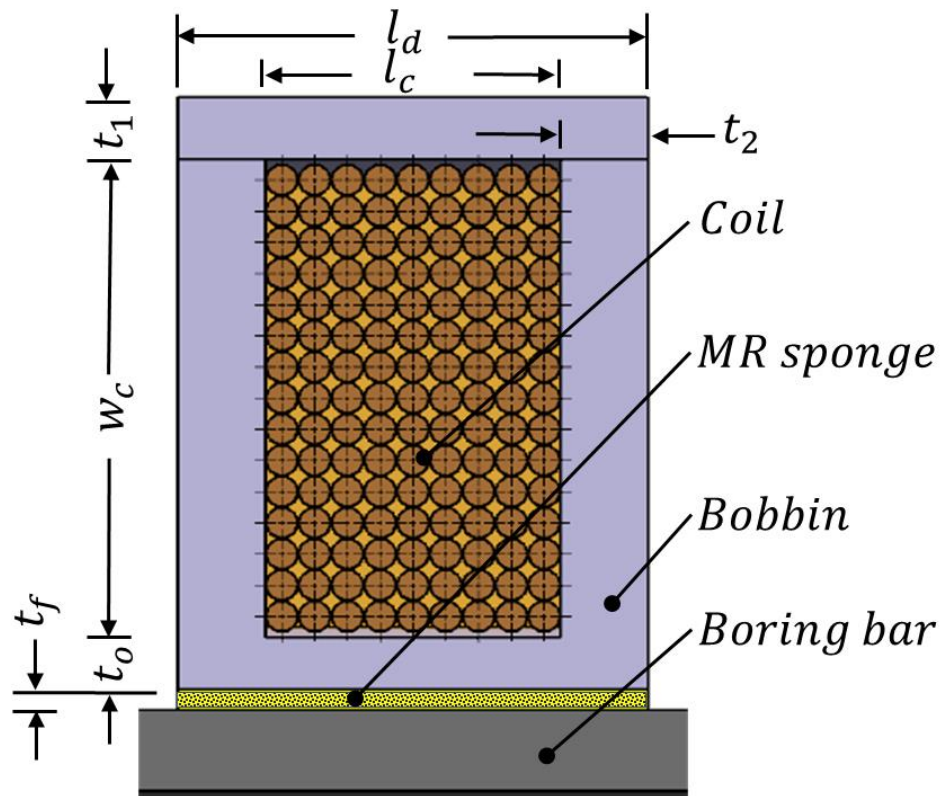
Dimensional parameters on 2D cross-sectional view of the MR damper.
